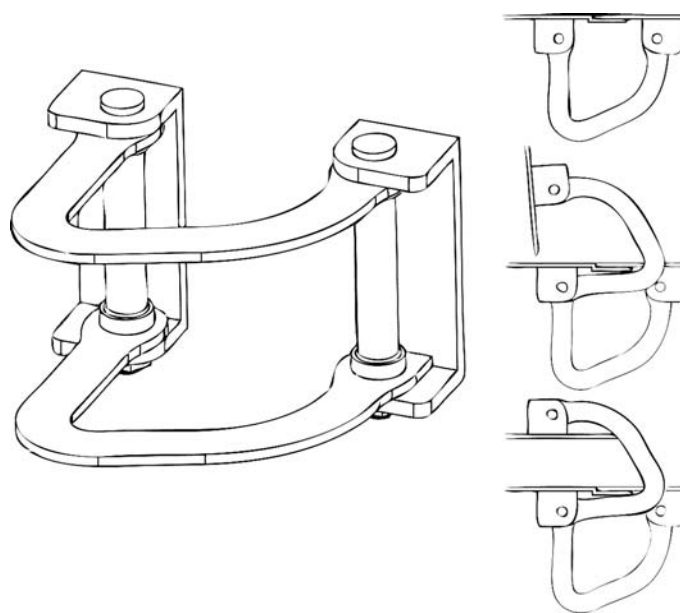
Principle drawing of the hinge showing the opening motion
